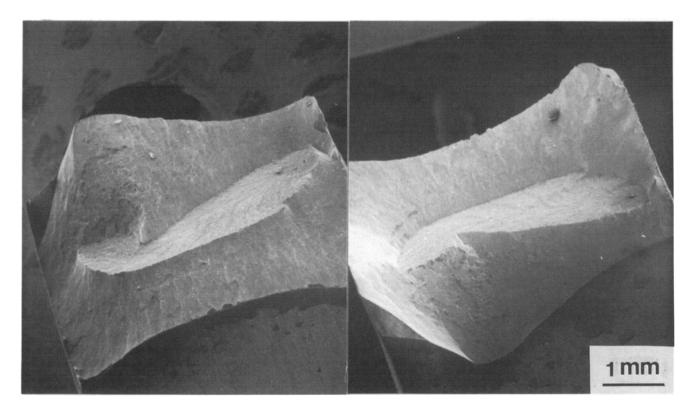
Fracture surfaces of C4340 specimen after severe cathodic charging with hydrogen, followed by tensile testing.
